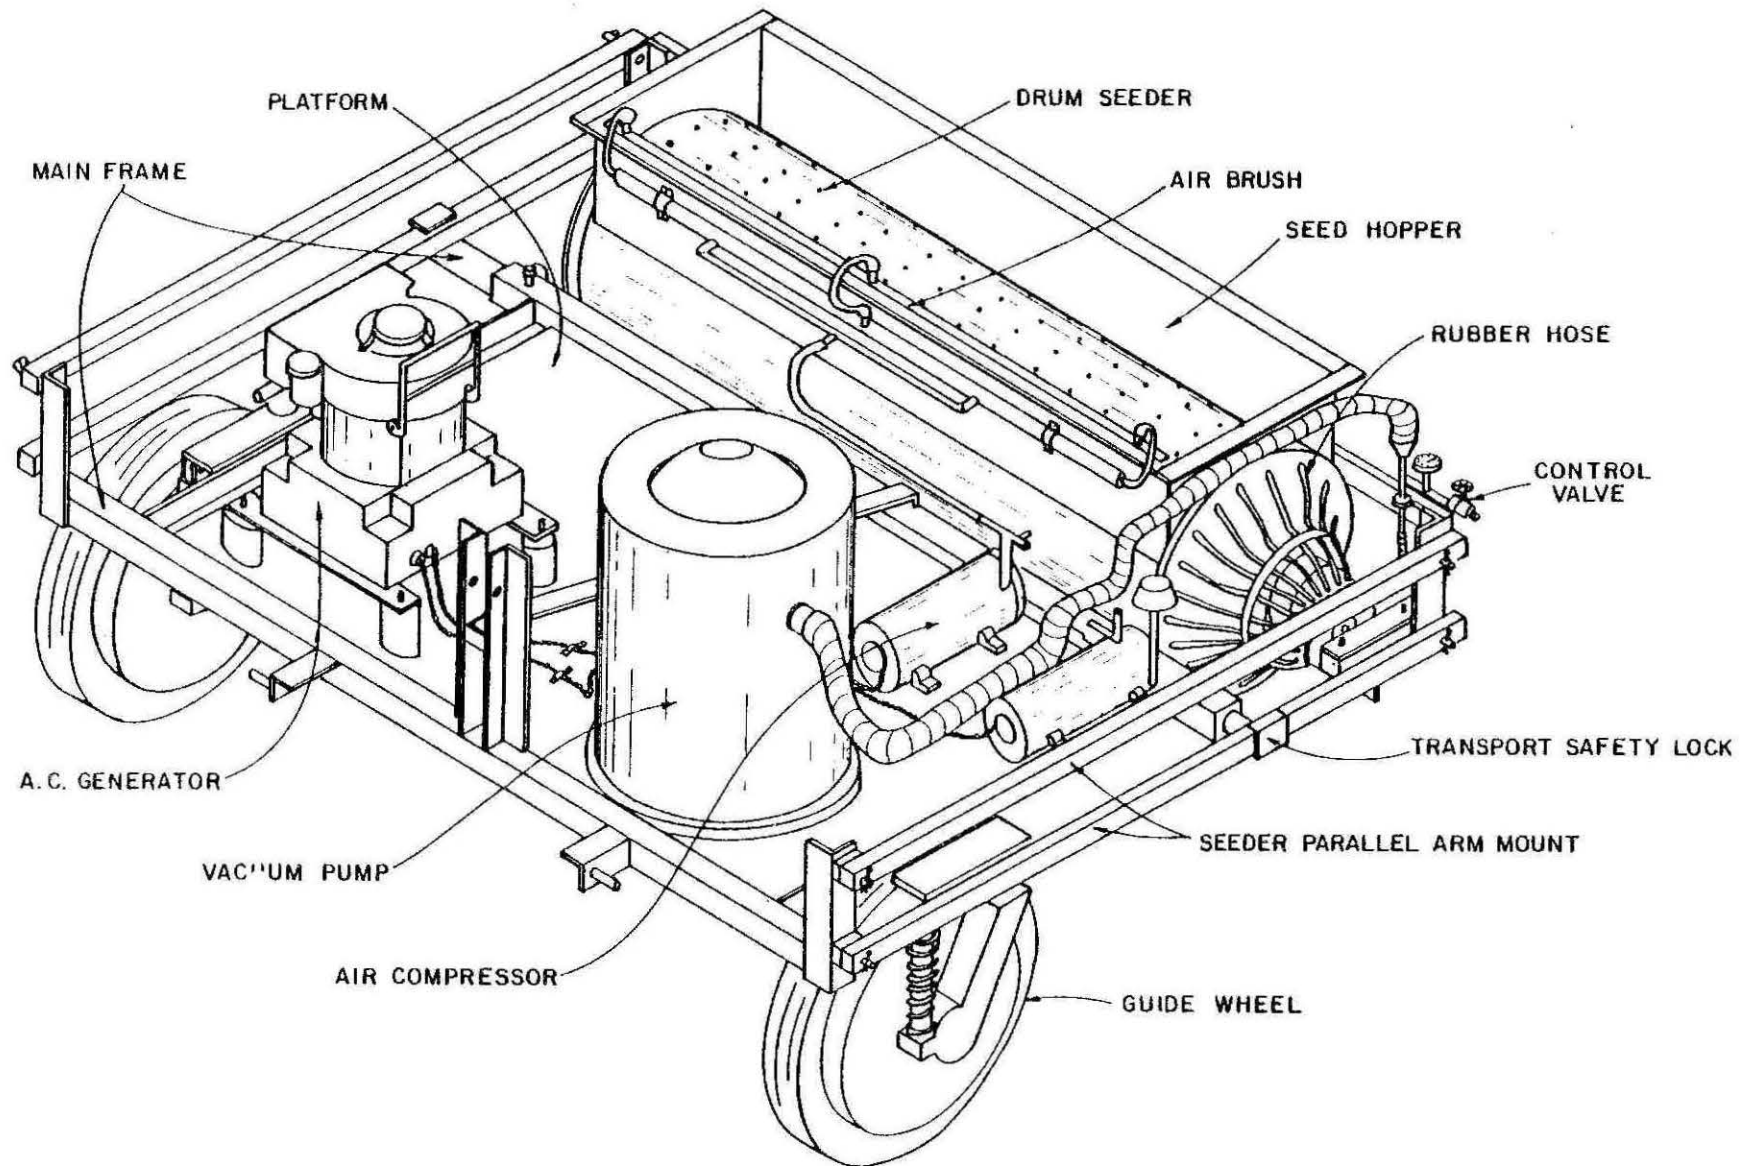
Schematic drawing of the precision drum seeder and the housing assembly complete with a three point hitch attachment.
